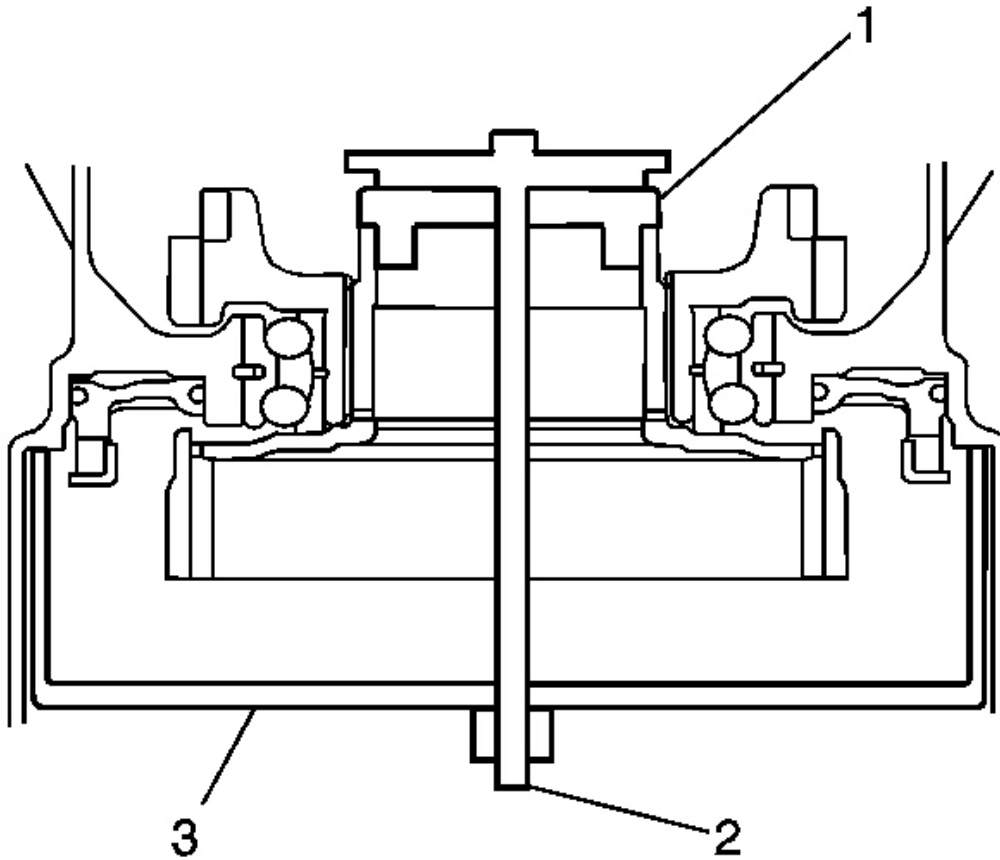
Planetary Ring Gear, DT 46455, DT 46457 & DT 46459
